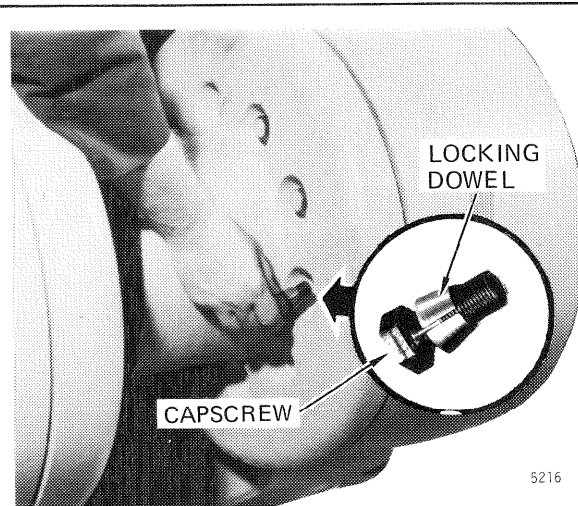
INSTALLATION OF DRUM AND DRUM SHAFT (Sheet 1 of 4)
